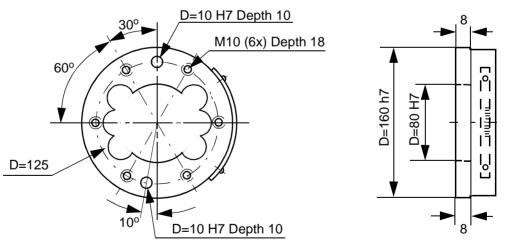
The mechanical interface of the insulated flange (dimensions in mm).
